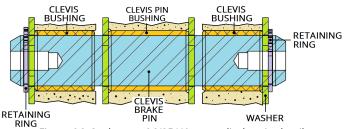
Seakeeper 26/35/40 rear cylinder pin details
